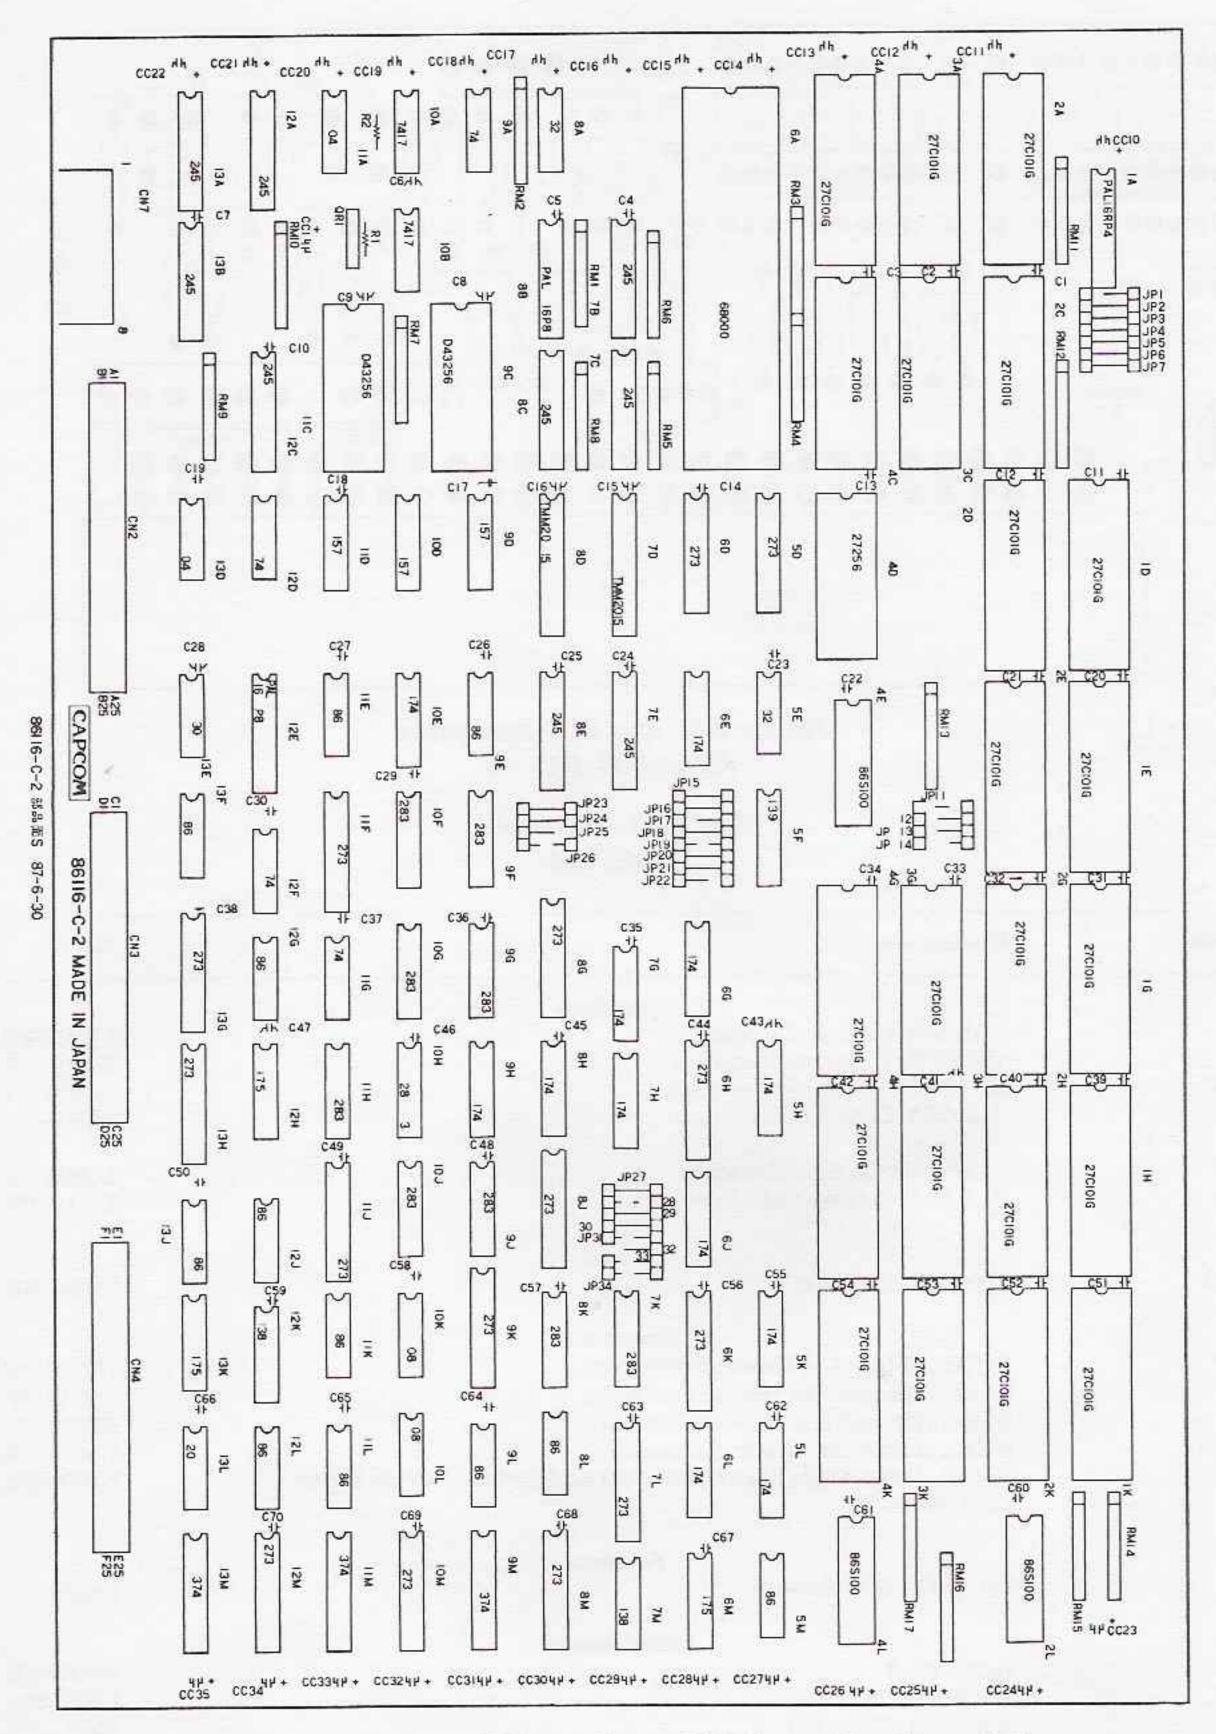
Street Fighter Game PCB Assembly (Board C) 86116-B
